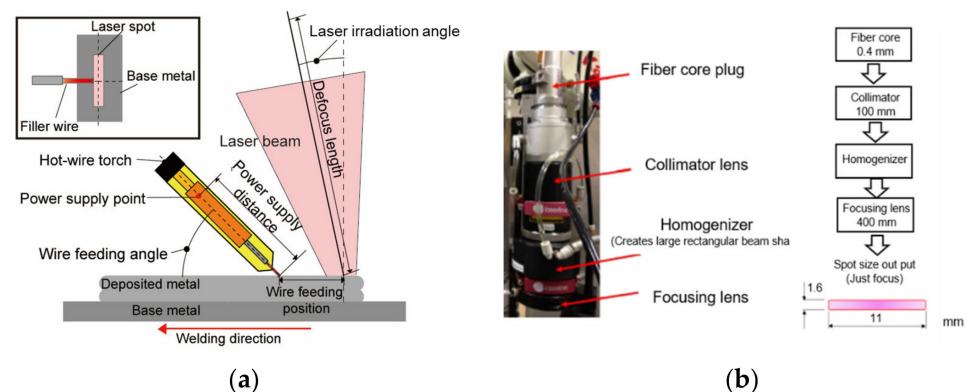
HLAM experimental setup: (a) schematic diagram of HLAM process; (b) laser head and beam shape.
